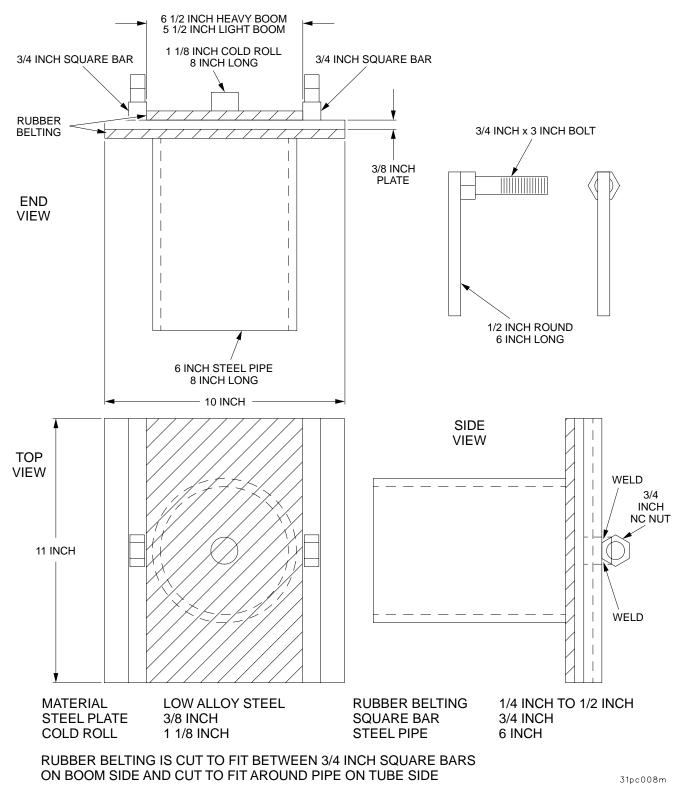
Dimensional drawing for fabricating improvised recoil mechanism exercising bracket for wreckers M543A2/M816
